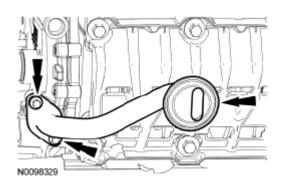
Locating Oil Pump Bolts Courtesy of FORD MOTOR CO.
